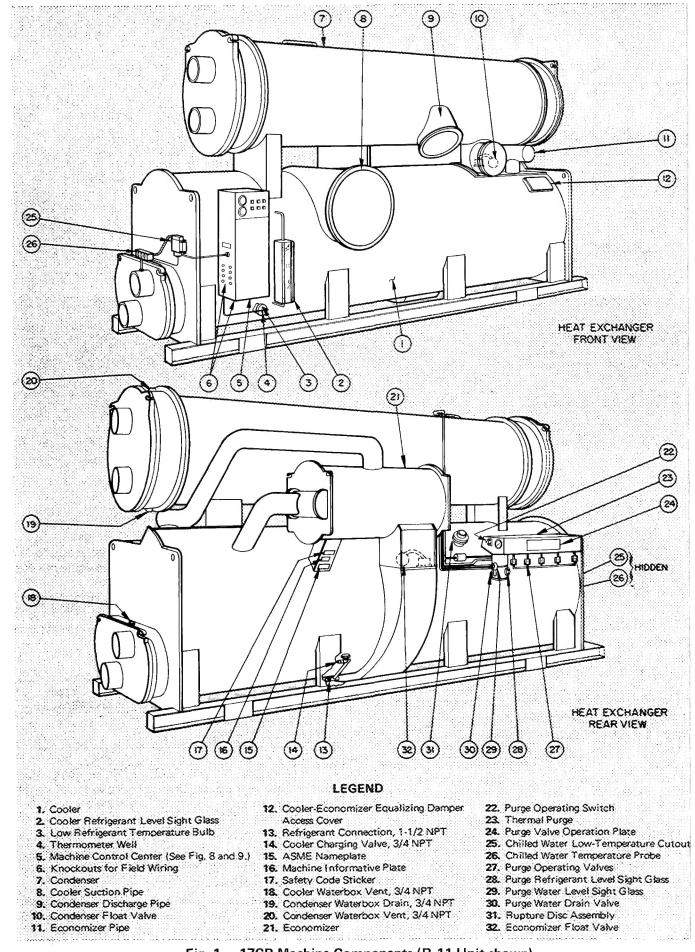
17CB Machine Components (R-11 Unit shown)
